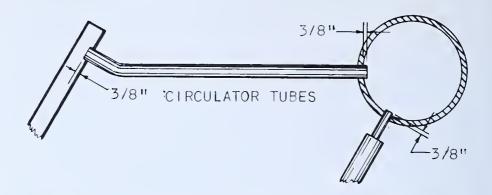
The Circulator Tubes Project into the Uptake Headers and the Steam Drum 3/8"
